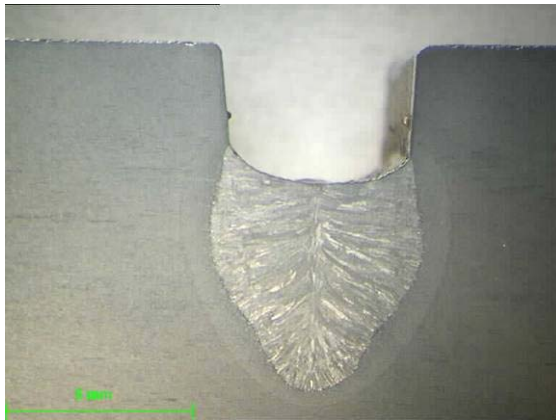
Single Wire Pulsed FCAW Welding Procedure, Pipe B19
